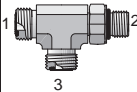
UPTC Seal-Lok is adaptable to a UPTC hydraulic or thermoplastic hose assembly. To be used with ET, EN, or EU hose ends.
